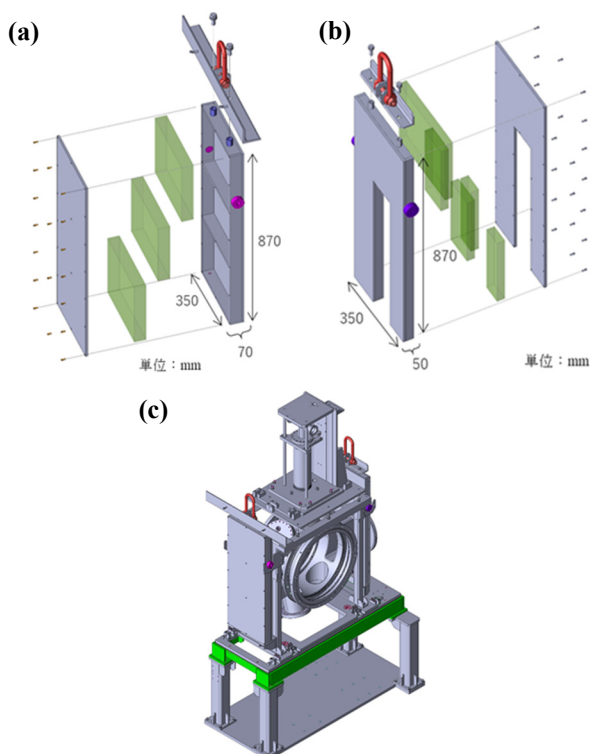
Schematic view of shield and new chamber B mount. (a) Inner shield. (b) Outer shield. (c) Both shield installed on new chamber B mount.
